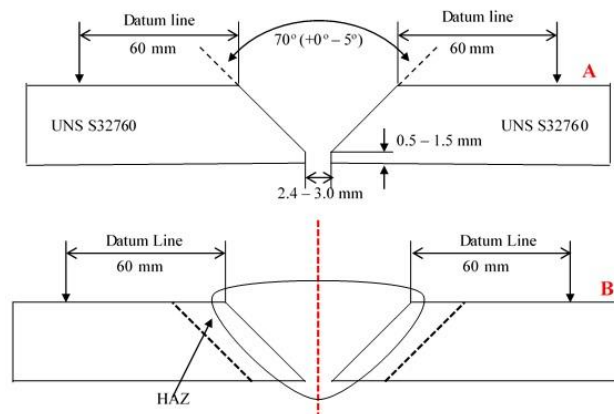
Joint Design: (A) Preparation and fit up of welding test coupons, (B) Cutting scheme of repaired test coupons.
